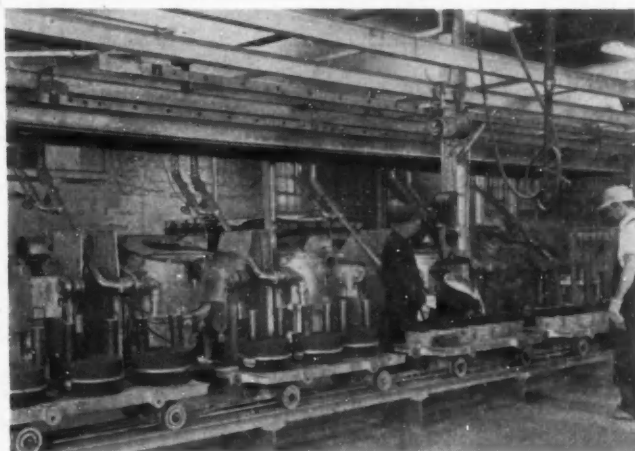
Narrow gage railroad cars carry completed and cured molds past the furnaces where molds are poured
